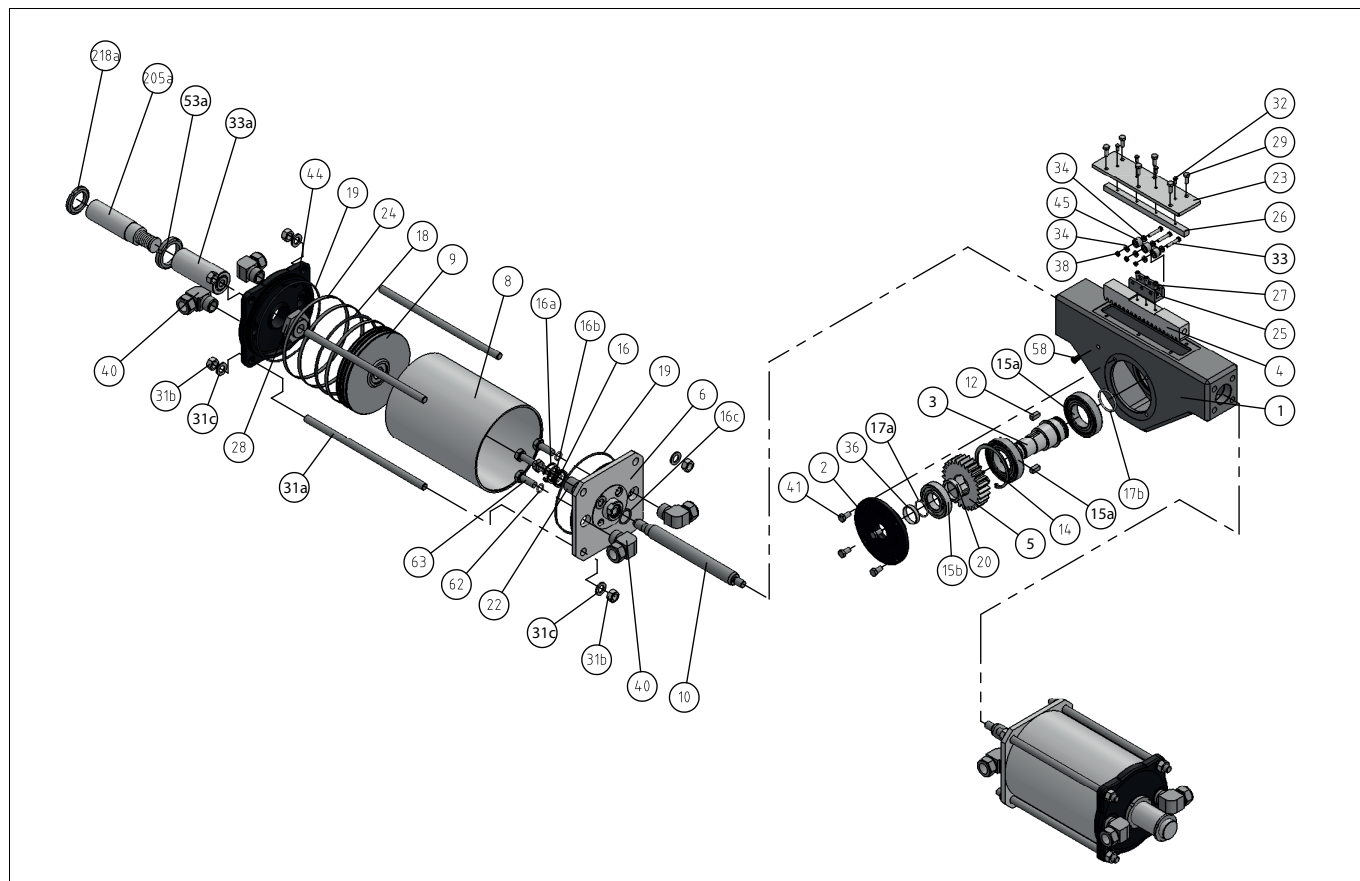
Exploded view of the actuator GAAXH03_BC17.
